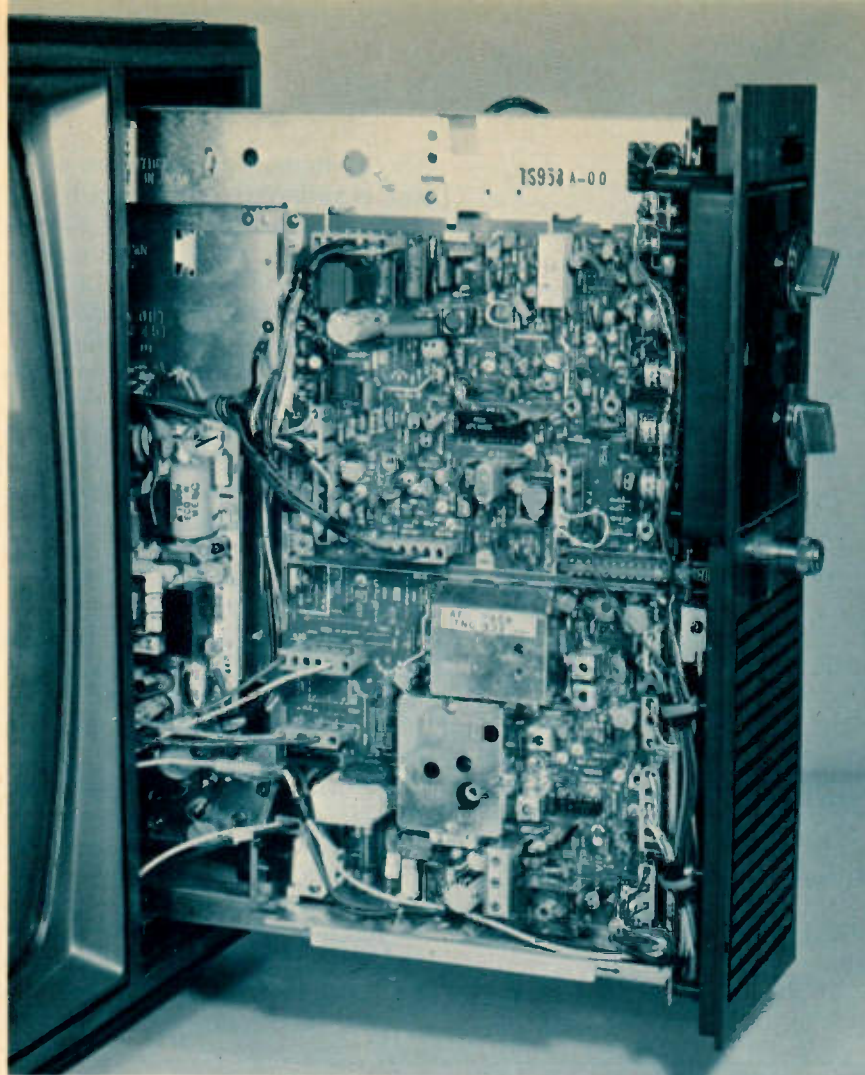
Heart of Quasar's TS-958 "Works In A Drawer" color TV chassis, shown here slid forward in service position, contains the Super Module, the pincushion module (to rear of Super Module), and the flyback assembly (mounted on opposite side of drawer).
